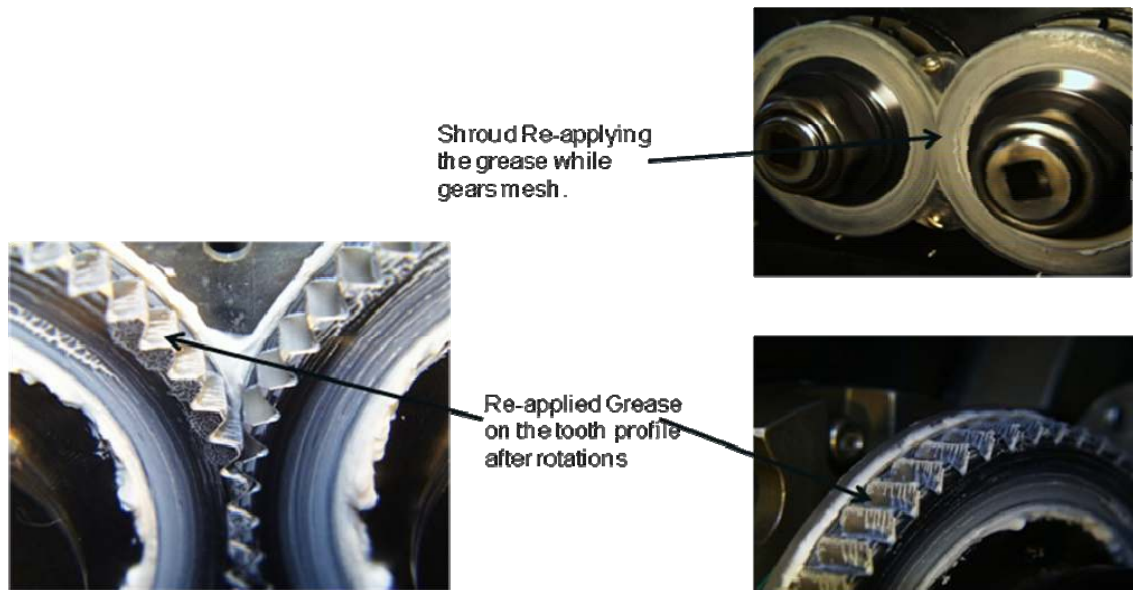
Shrouds on the high-pressure angle gears during tests.
